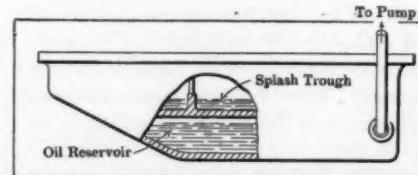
Illustrating the oil pan casting of the Bergdoll with the lead to the oil pump
